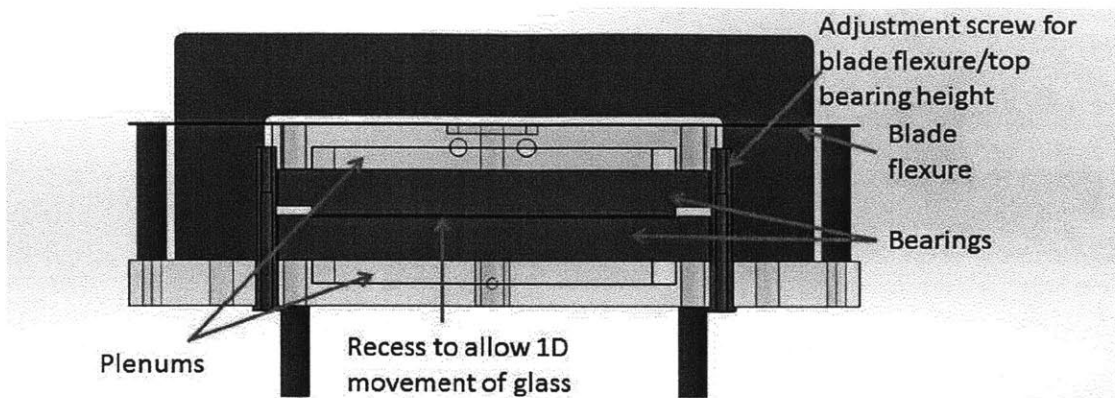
Solidworks cross-sectional view of 1D shear testing device
